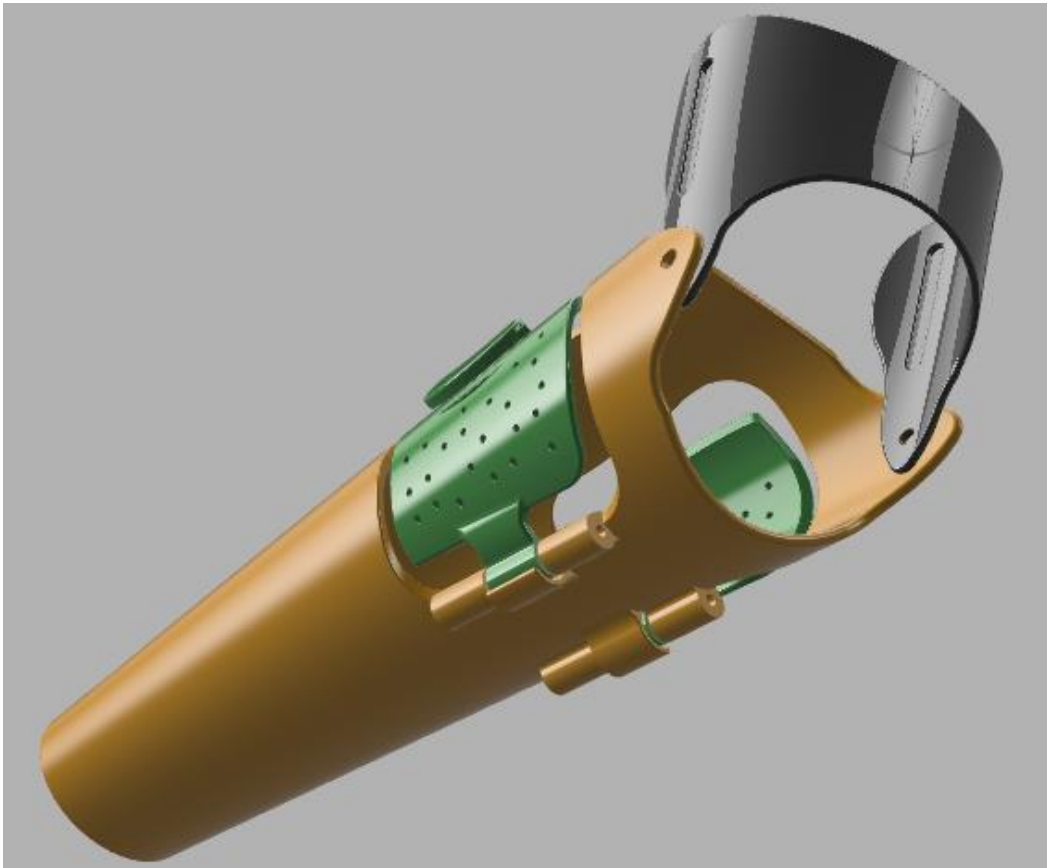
The V3D socket, back view. The back hinges were optimized to have a shield that restricts the range of rotation of the adjustable wings. The adjustable wings have holes for providing ventilation.
